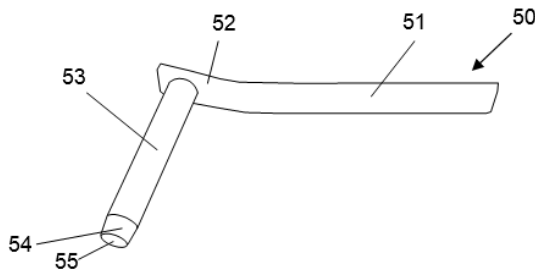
a perspective view of a second tool providing a drill sleeve for guiding a drill being used for drilling a bore hole for insertion of the device according to the invention
